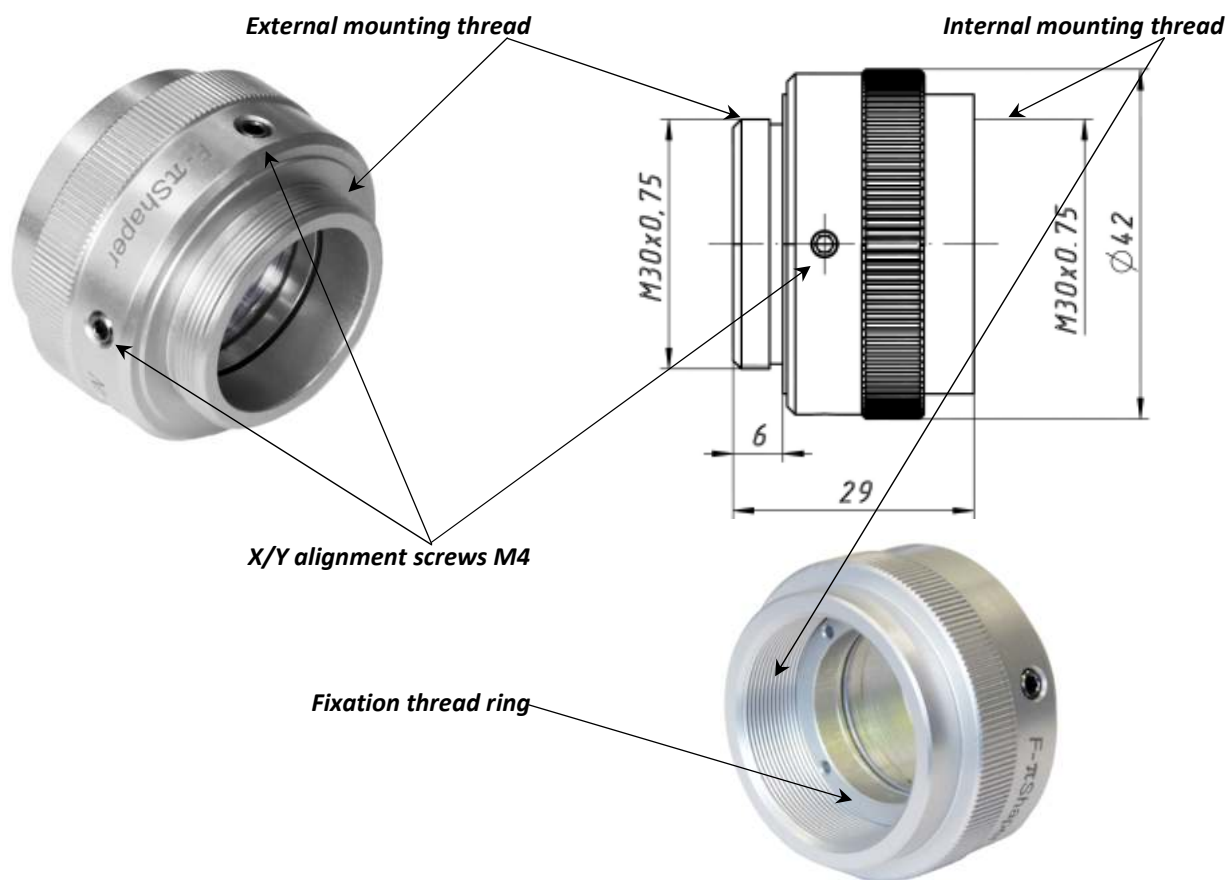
F- $\pi$ Shaper* with CA 20 mm and outer/inner mounting threads M30x0.75.
